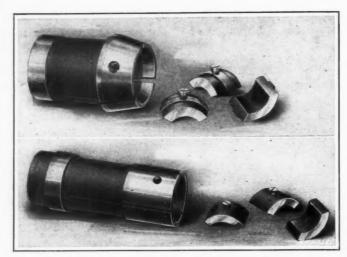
Master Spring Chuck and Feed Chuck with Gripping Jaws
